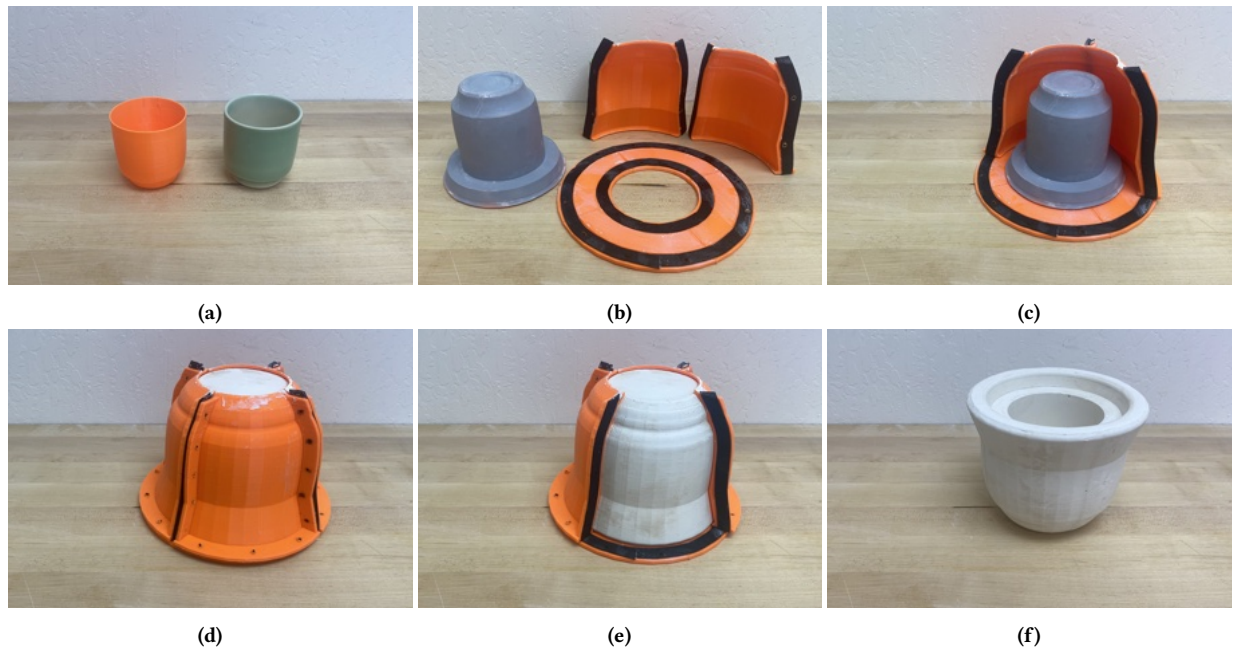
(a) the design proof and associated finished ceramics piece. (b) the mold components with gasket applied and inner mold smoothed with primer. (c) mold partially assembled. (d) plaster poured into mold. (e) mold being disassembled from cured plaster. (f) final plaster slip casting mold.
